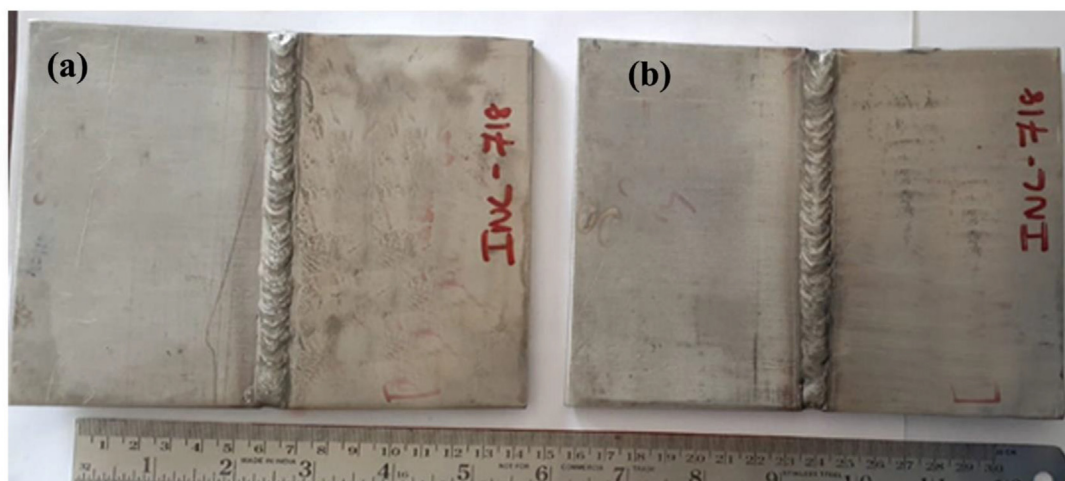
Developed dissimilar weldments using (a) CC-TIG and (b) PC-TIG welding processes.
